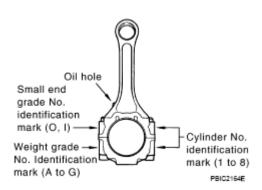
Identifying Cylinder Number Marks On Connecting Rod Courtesy of NISSAN MOTOR CO., U.S.A.
